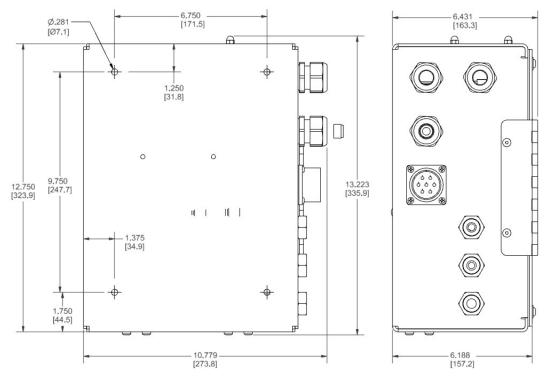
Night Scan Vertical Control Box Mounting Hole Locations
